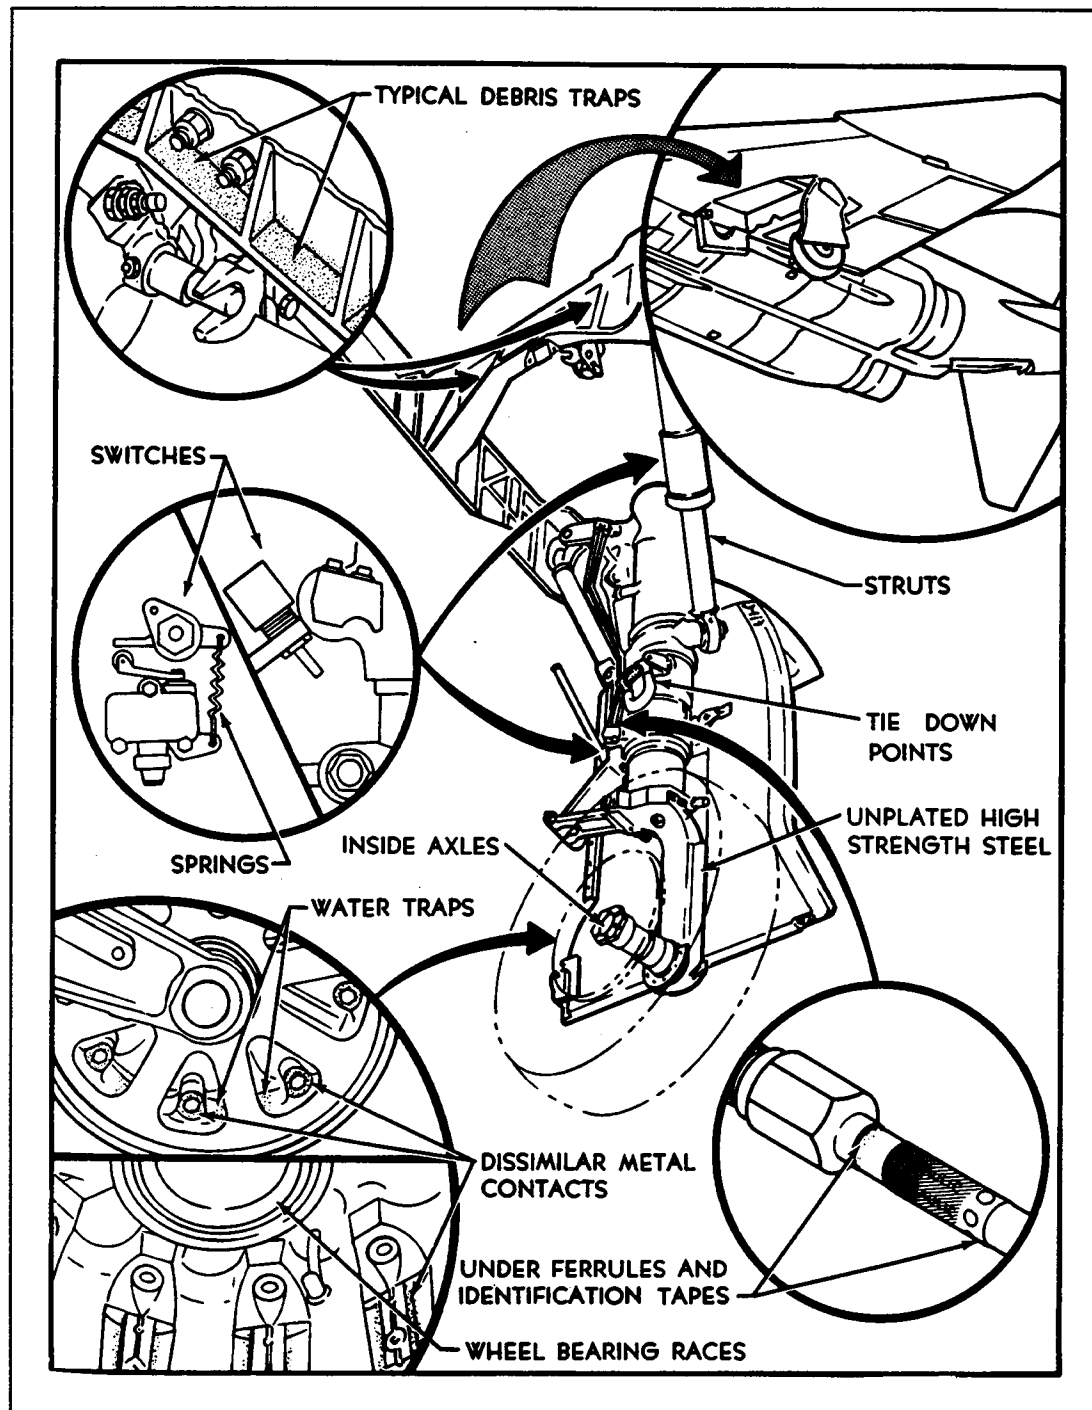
LANDING GEAR AND WHEEL CORROSION POINTS
